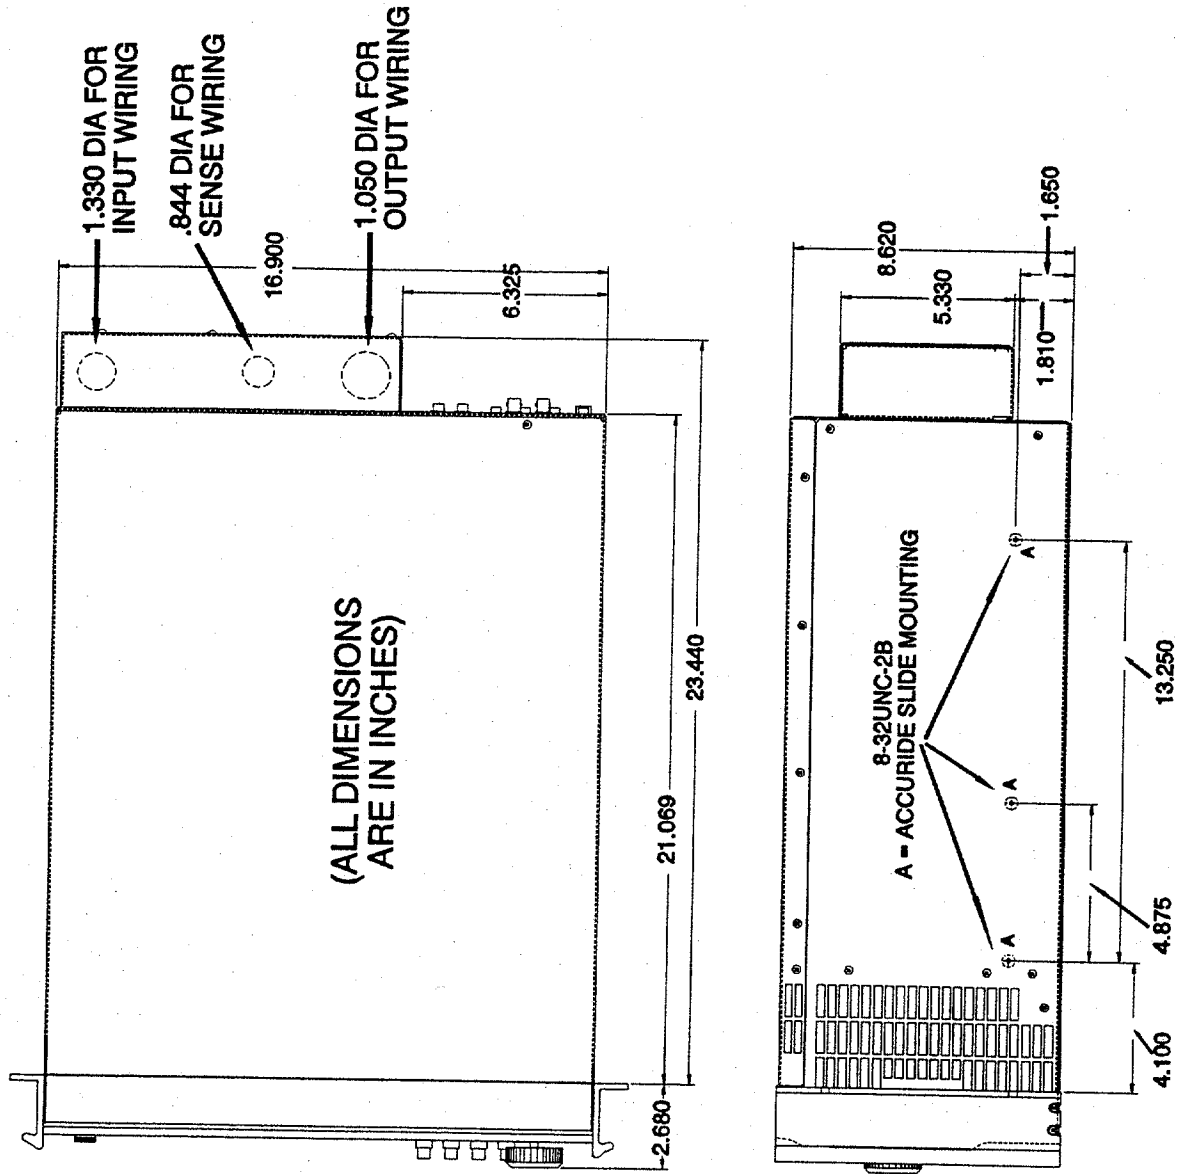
SW 5250 (Top and Side View) Mounting Dimensions
